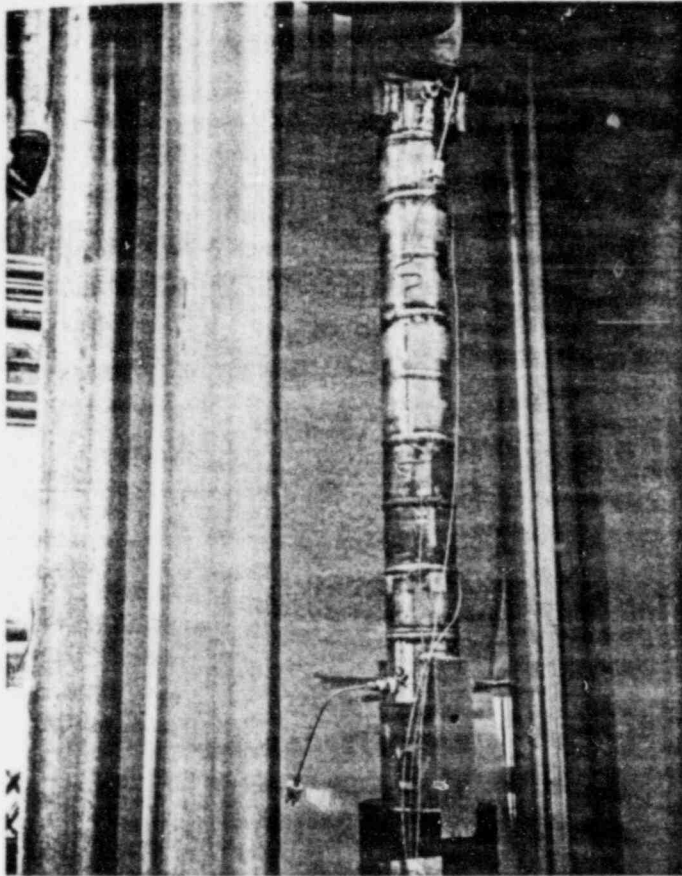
Another View of Pipe Weldment Shown in Figure 9
